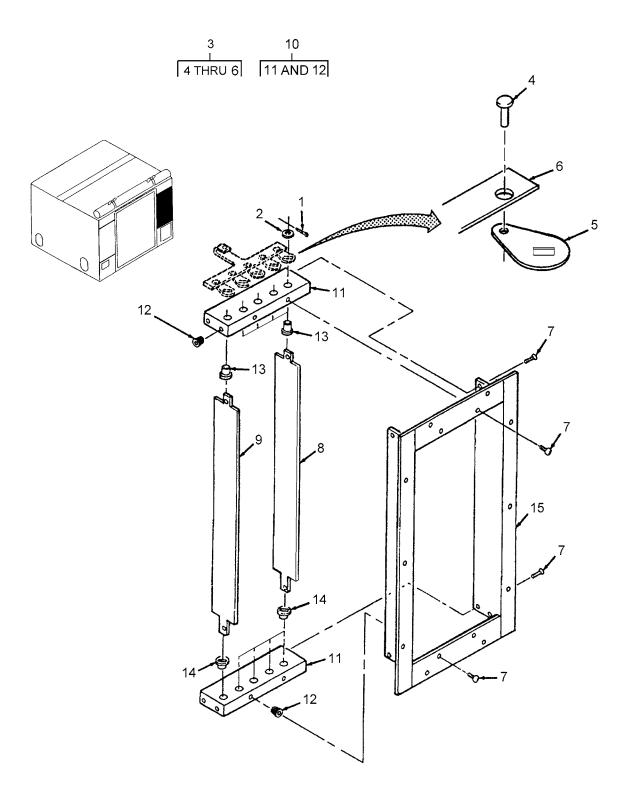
Condenser Air Exhaust Louver Assembly (Left)
